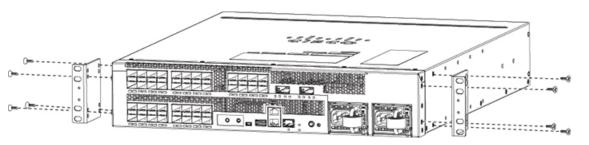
Installing the chassis on a Rack with a 17.5 in. (44.45 cm) Opening
